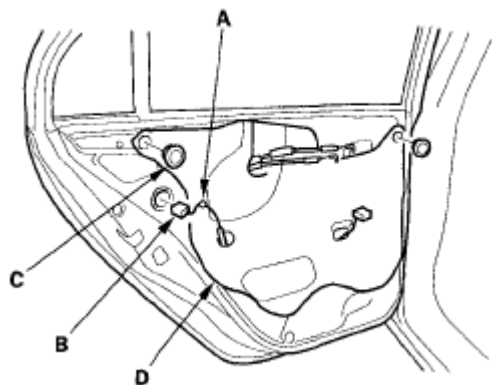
Disconnecting Power Door Lock Actuator Connector
